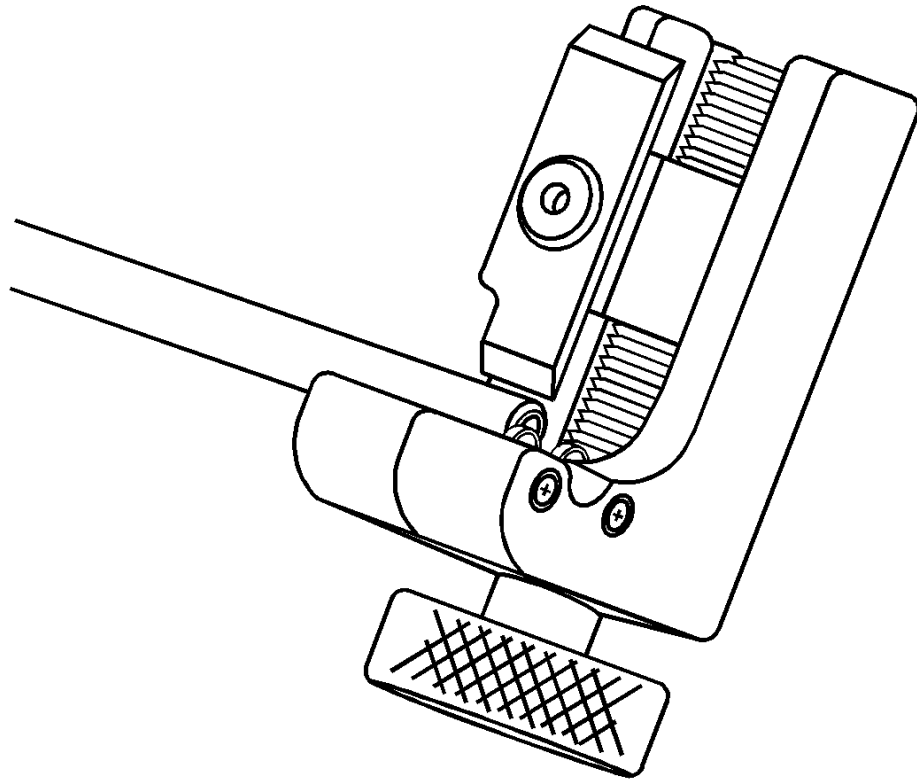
Stripping Nylon Coating From Brake Pipe Ends
